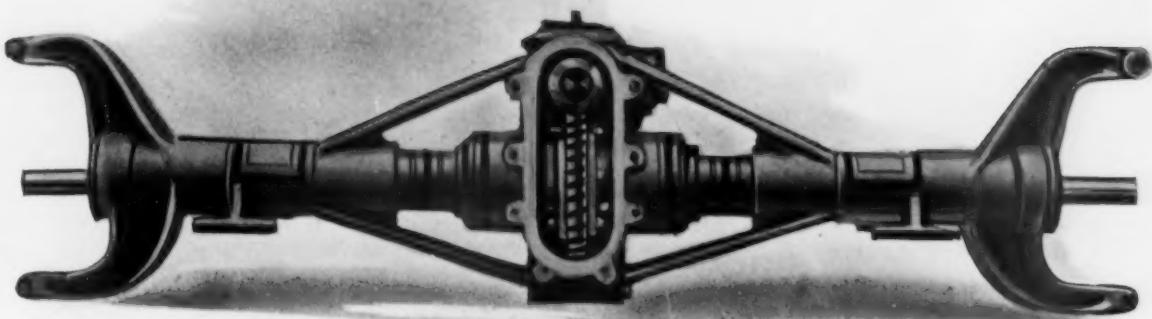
Front Axle With Cover of Housing Removed, showing the worm wheel
